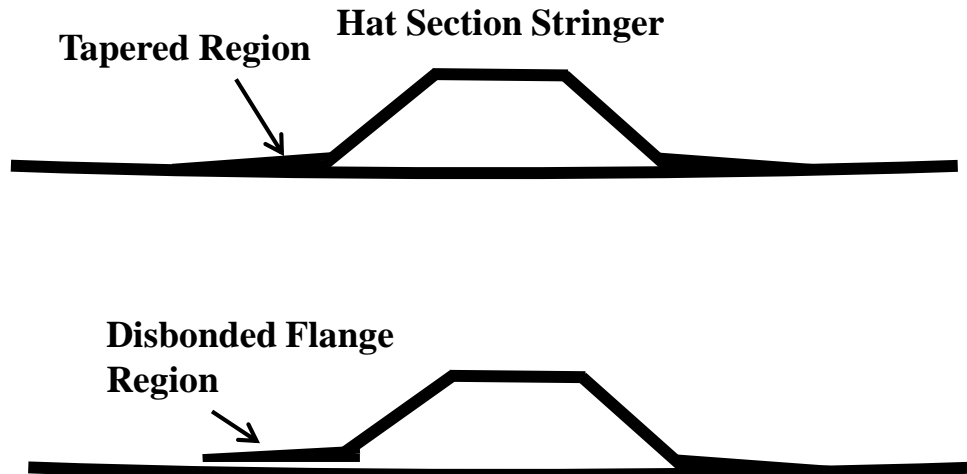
Tapered Hat Section Stringer Geometry and Disbonded Stringer Flange Example
